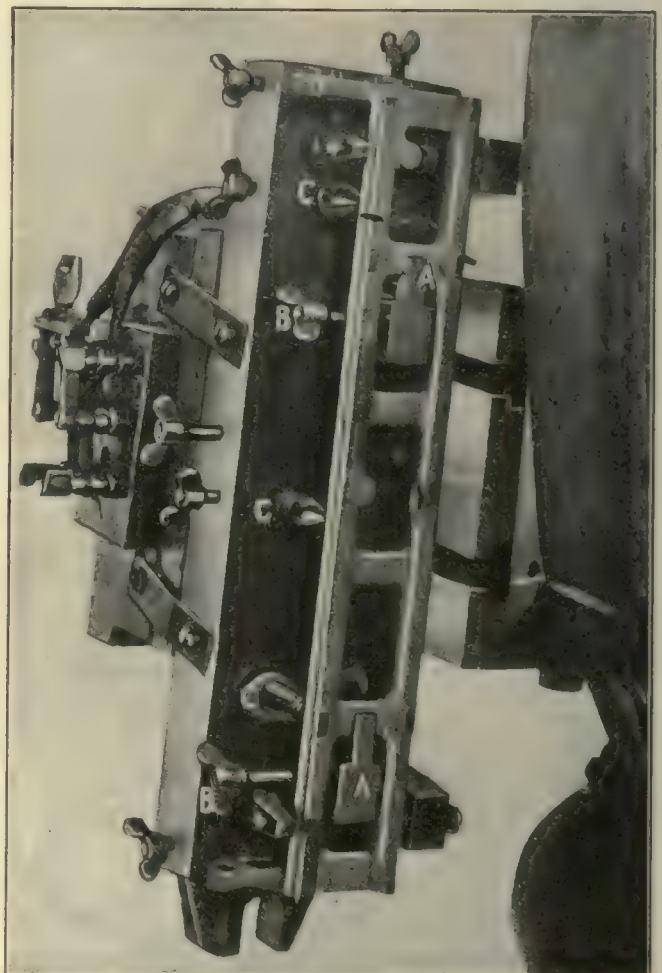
MAGNETIC CHUCK ON A DISK-GRINDING MACHINE
